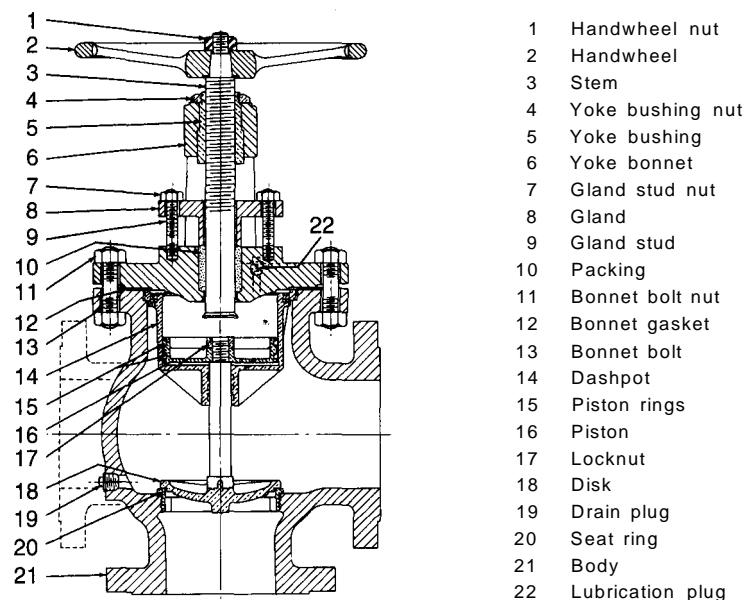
Stop-check valve. Courtesy Crane Company.
